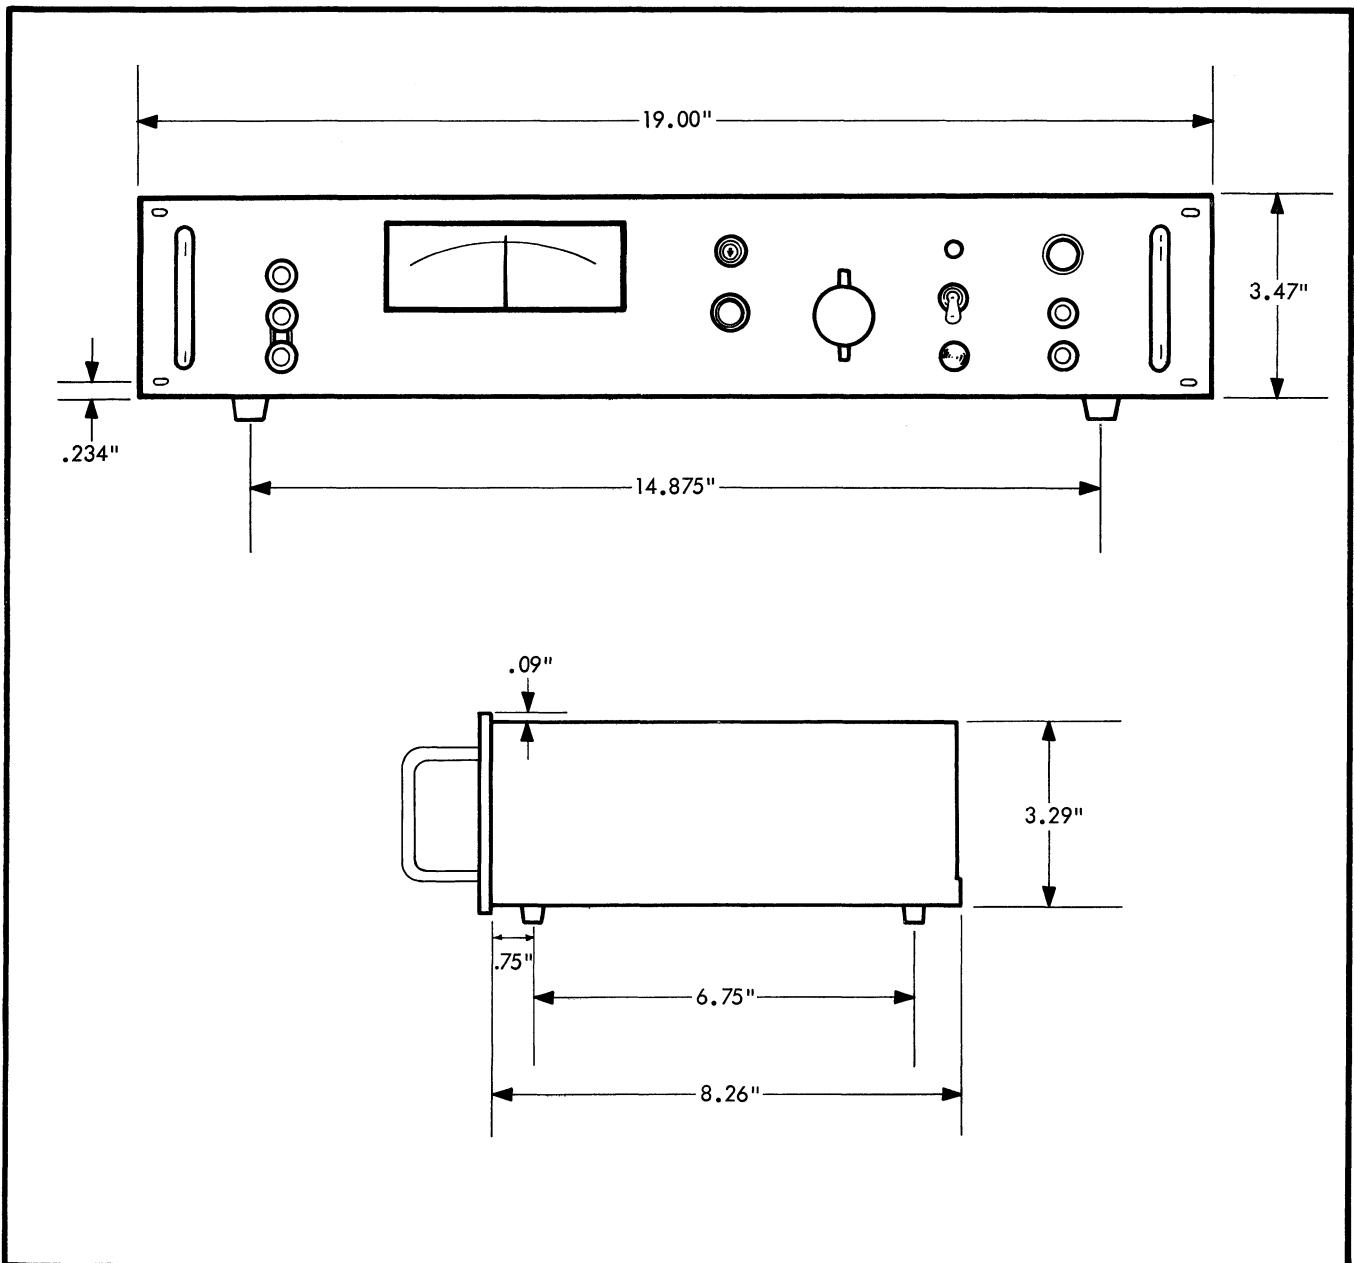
MODEL 845AR OUTLINE DRAWING
